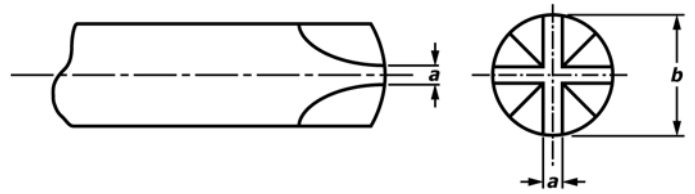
Dimensions of Cruciate-Slot Screwdriver Bit
